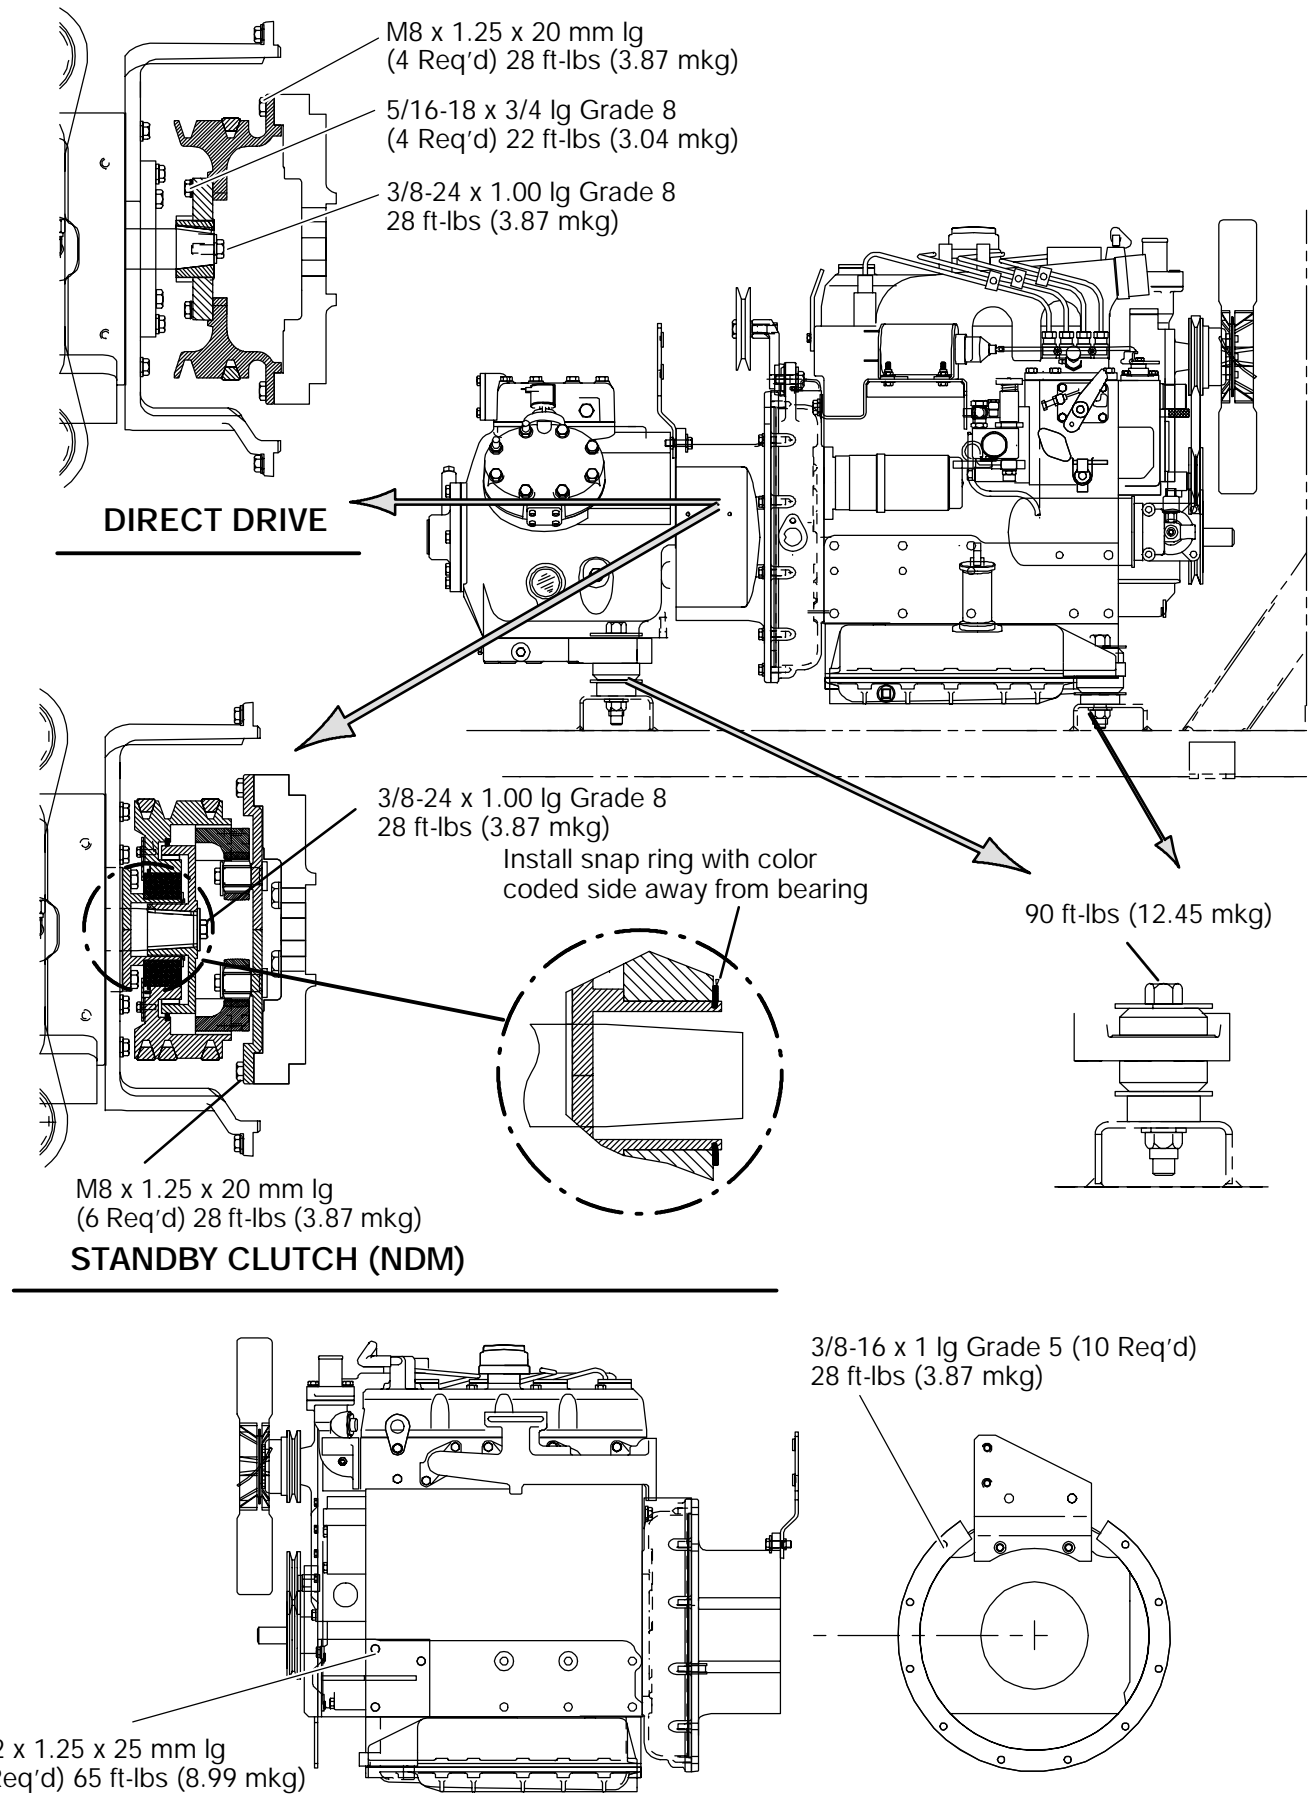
Genesis TR1000 -- Unidrive Torque Requirements
